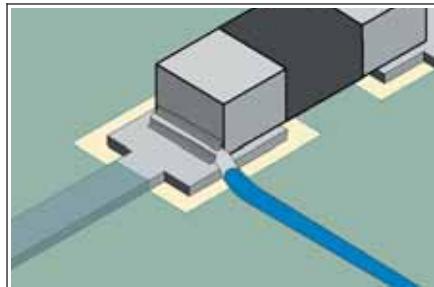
Not Recommended Soldered perpendicular to component lead.
